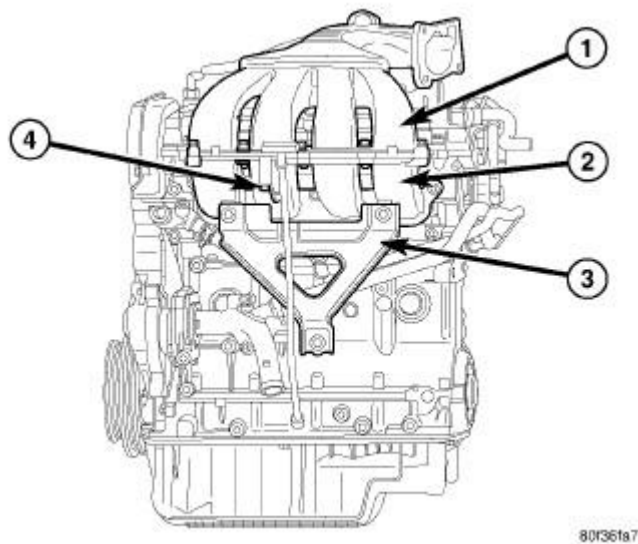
Lower Intake Manifold Support Bracket - 2.4L Turbo
